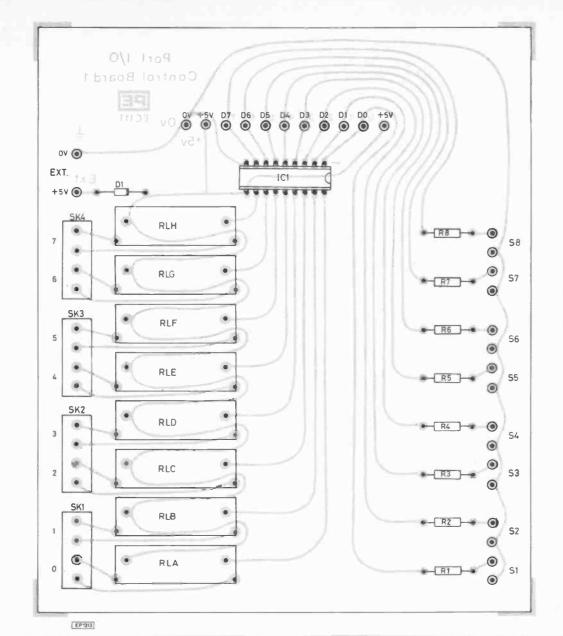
Low voltage output control board printed circuit layout (actual size)
